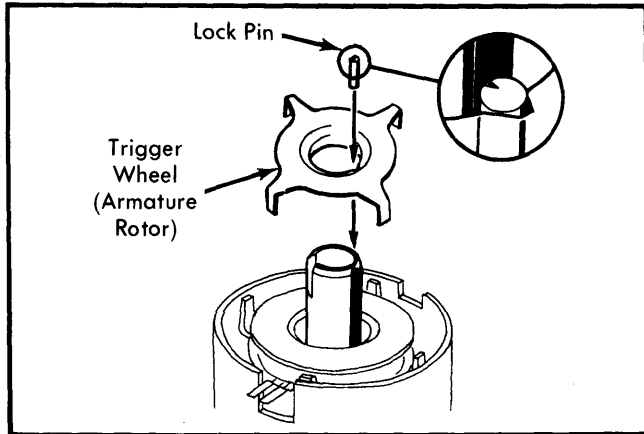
Installing Trigger Wheel (Armature) and Lock Pin
